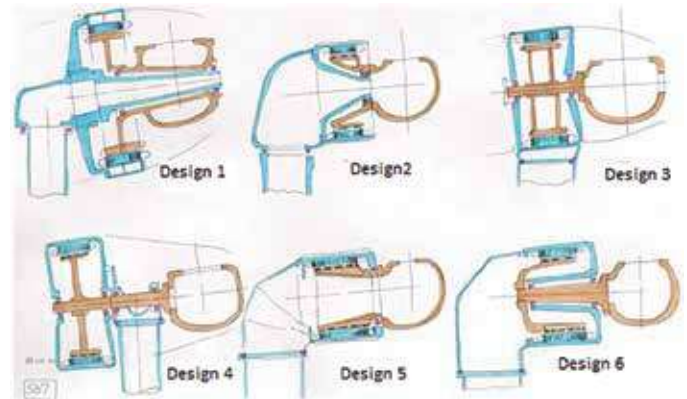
DD Wind Turbine Arrangements for Inner Generator Rotor (Adapted from²)
